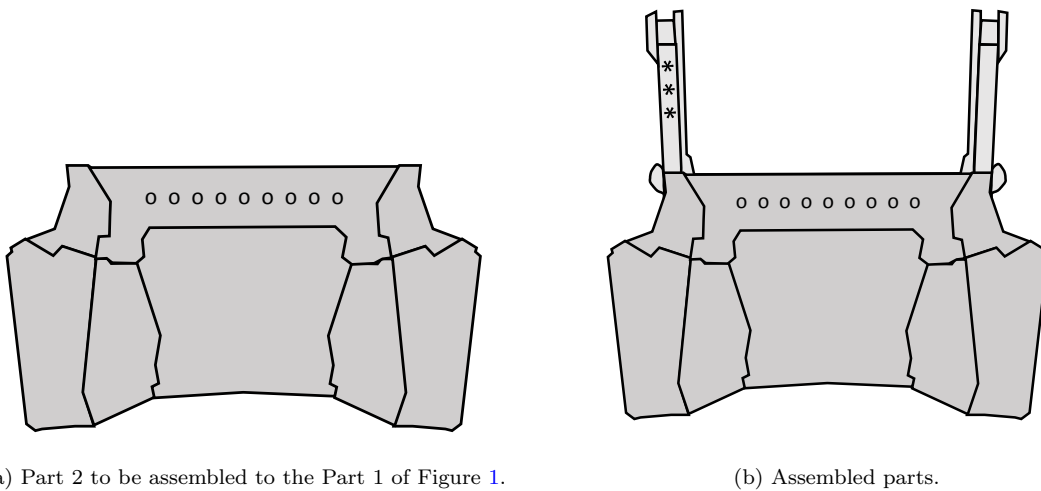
Representation of the parts assembled by the assembly line in the case study (Figure 1 and 8a). The asterisks and circles represent welding points. Note that after the assemblage, some points of Part 1 became inaccessible to further welding procedures.
